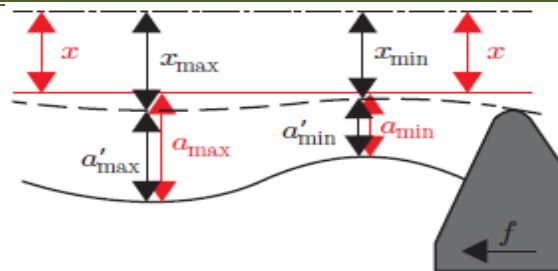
Impact of static loading/cutting on a workpiece with varying nominal thickness
